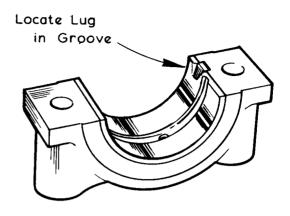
MAIN BEARING SHELL & CAP. Fig. 11. CONNECTING ROD & SHELL.
